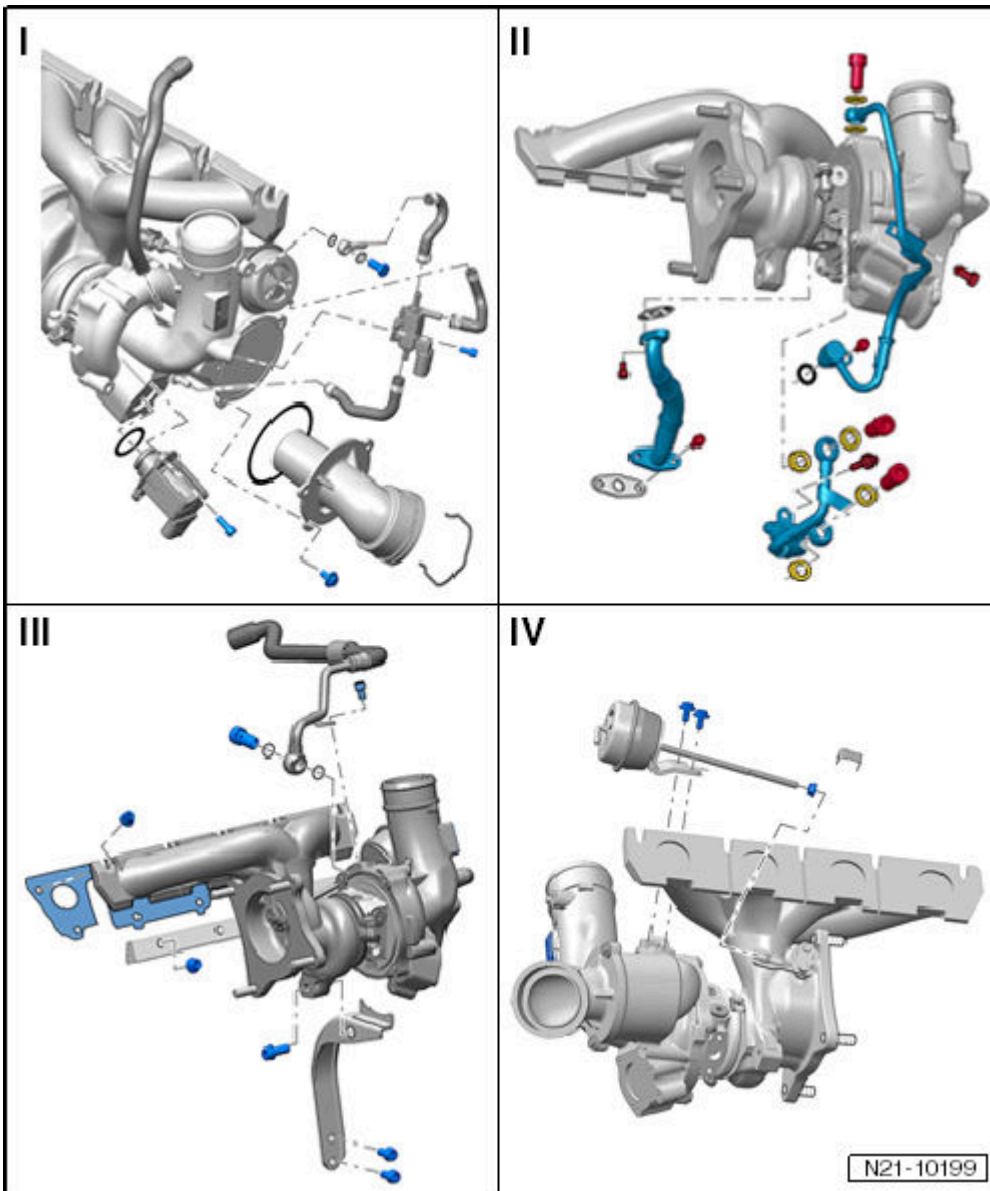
Identifying Assembly Overview: Turbocharger Component
